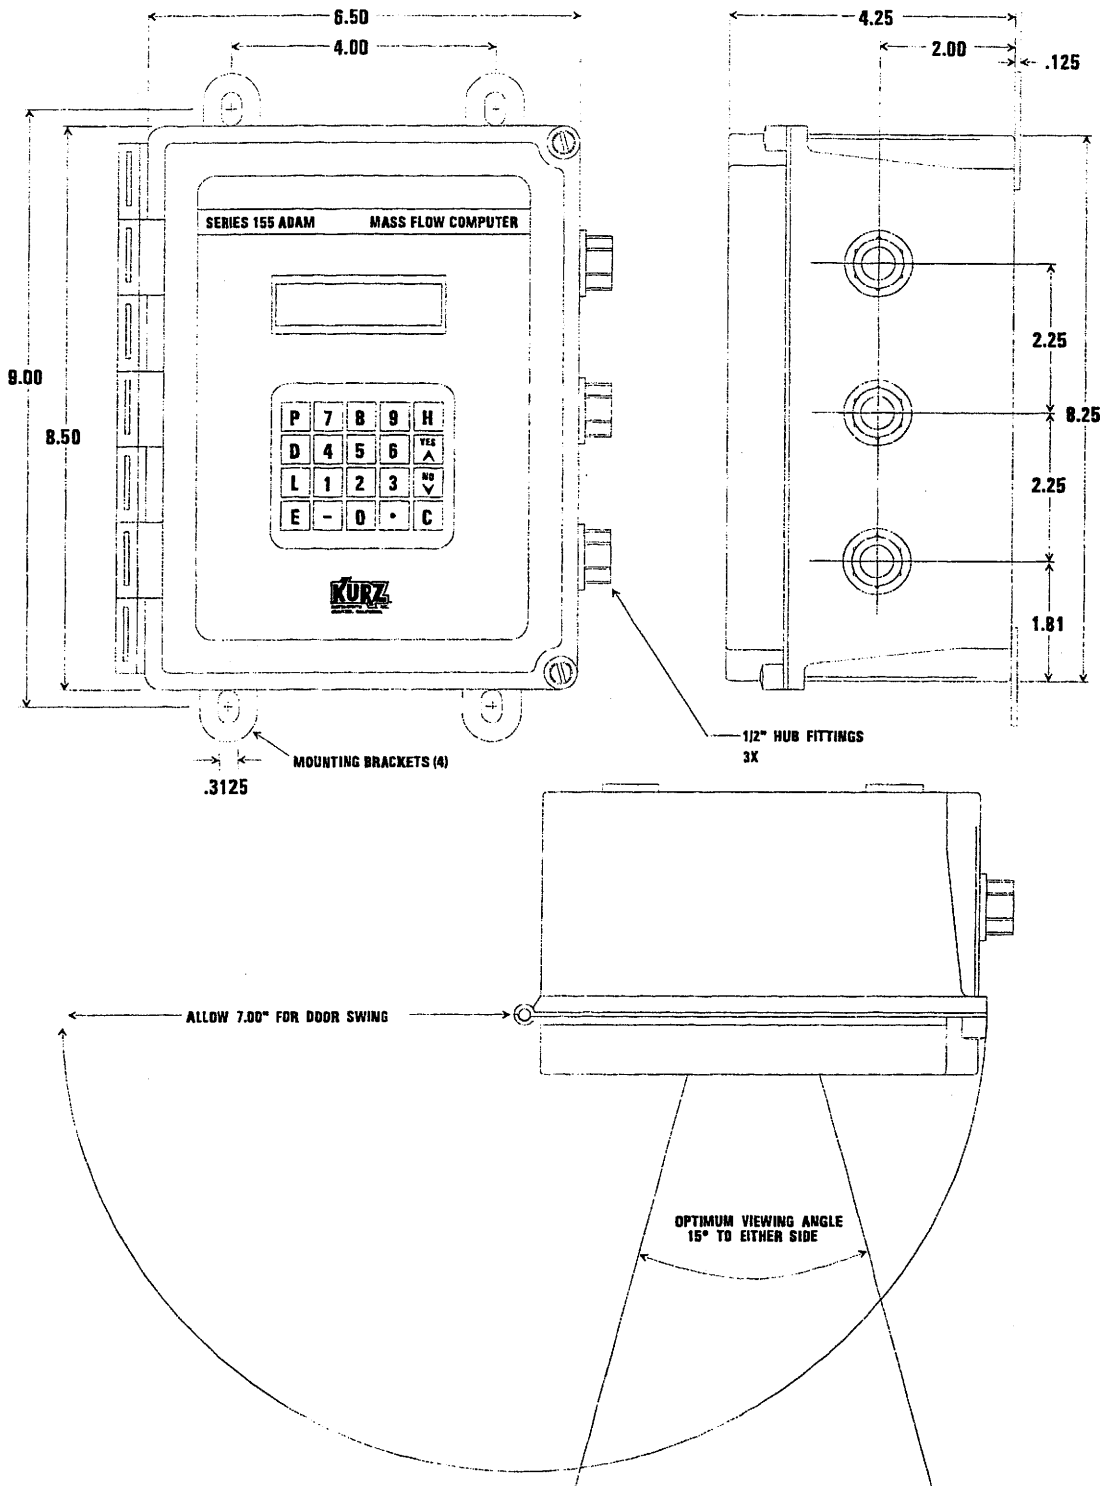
, Installation Dimensions, NEMA 4X Type Enclosure
